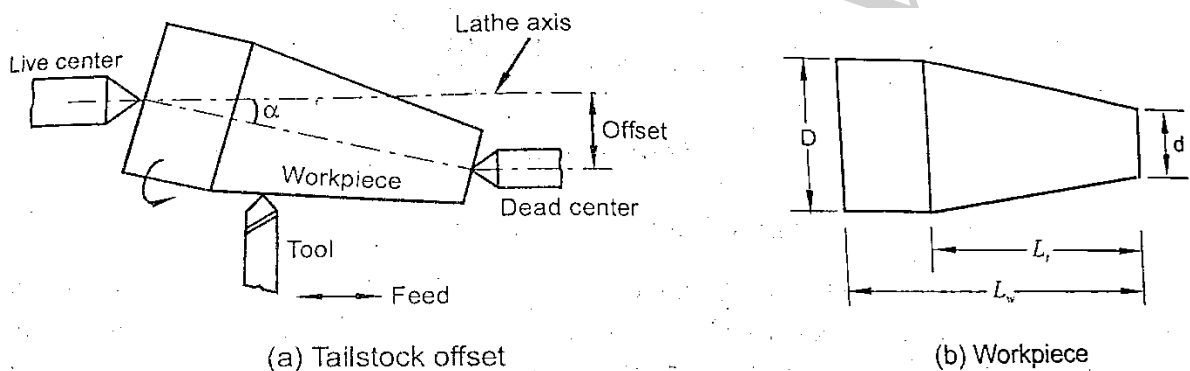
Taper turning by offsetting the tailstock (tailstock set over method)
